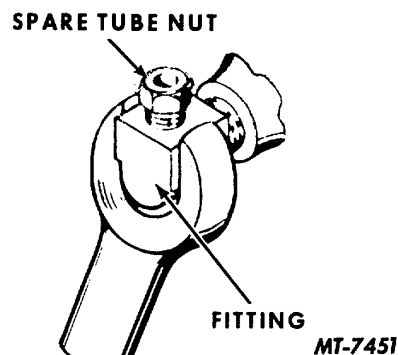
Protecting Fitting Against Damage During Removal or Installation
